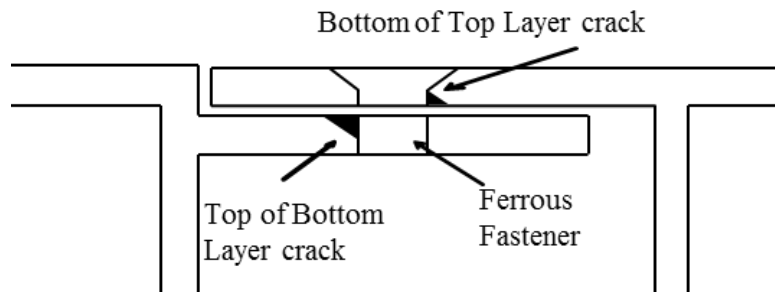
Cross-section of a typical lap-joint configuration showing bottom-of-top layer and top-of-bottom layer cracks along with the ferrous fastener location [8].
